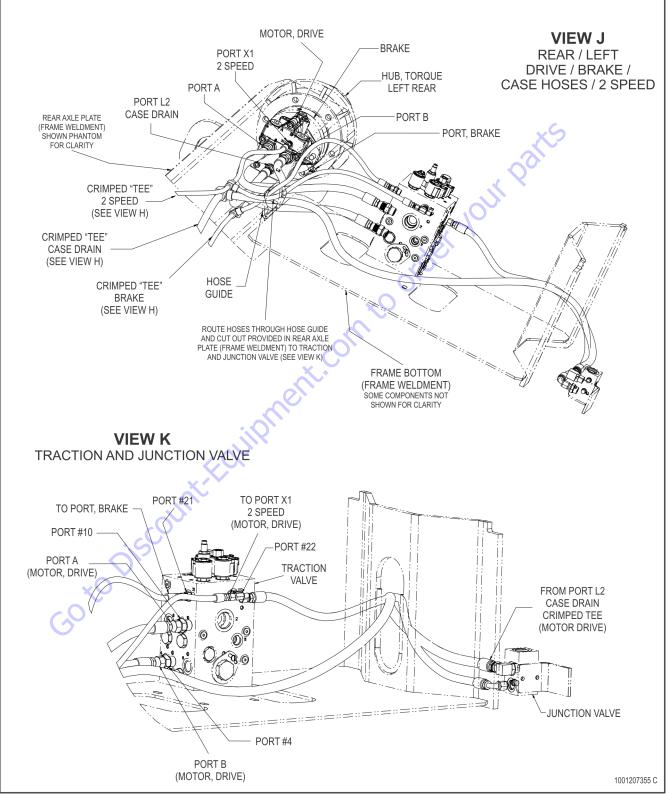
Hydraulics Installation - Sheet 13 of 28
